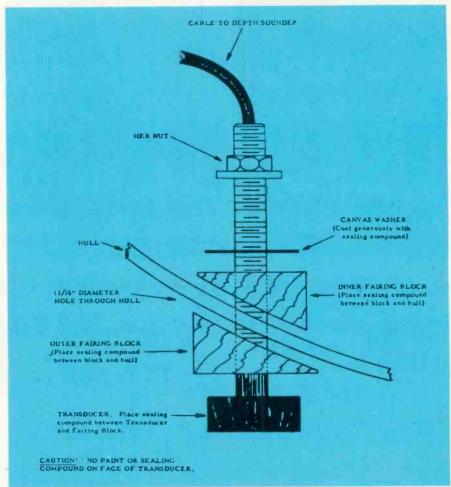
Typical through-hulf transducer installation shows use of fairing blocks to provide parallel mounting. (Courtesy Raytheon)
